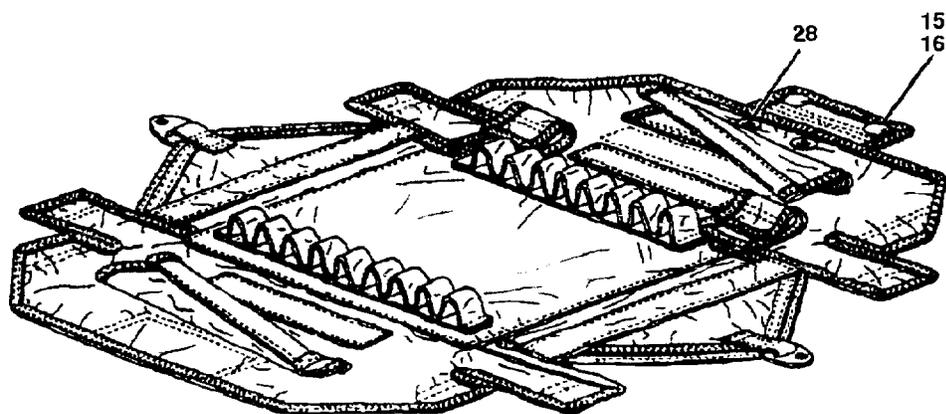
NC-3 Personnel Parachute Assembly (Sheet 2 of 4)
